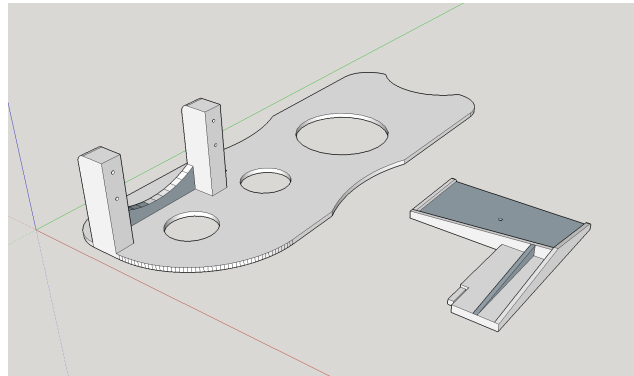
CAD design of the card feeder. Servo motor attaches to the bigger plate on the left and card holder on the right attaches to the arm of the servo motor. Card holder is designed to fit standard sized payment card.
